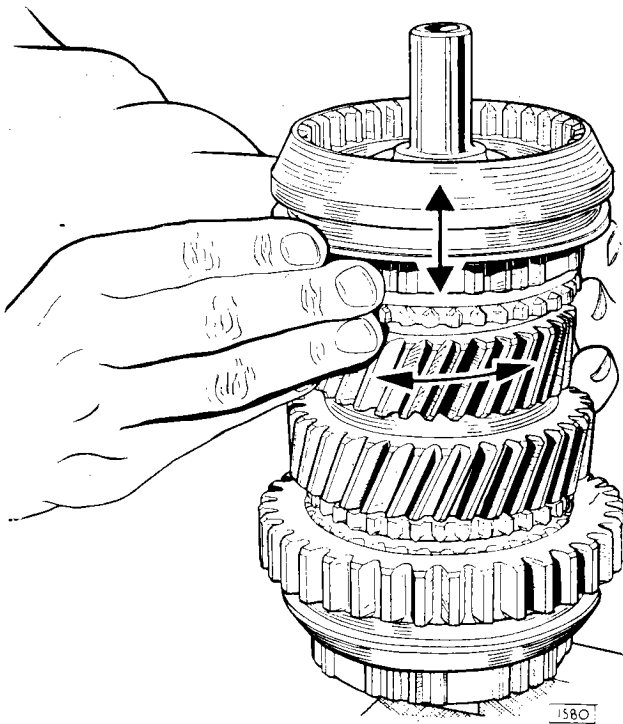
Checking the 4th (top) interlock plunger. With the top gear engaged there should be approximately $\frac{1}{16}$ " (4.76 mm) axial movement without any drag. With the top gear still engaged and with a slight downward pressure exerted on the synchro assembly the 3rd speed gear should be free to rotate
